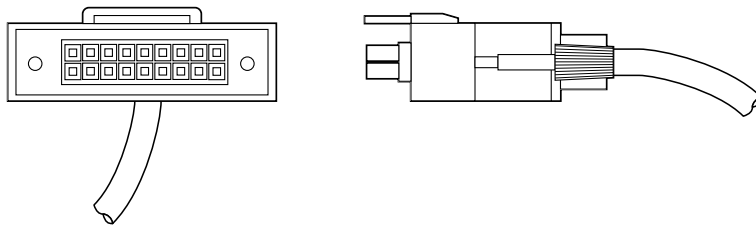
EPS-C2 2x9 Pin Redundant Power Cable with Connector Key Tab
